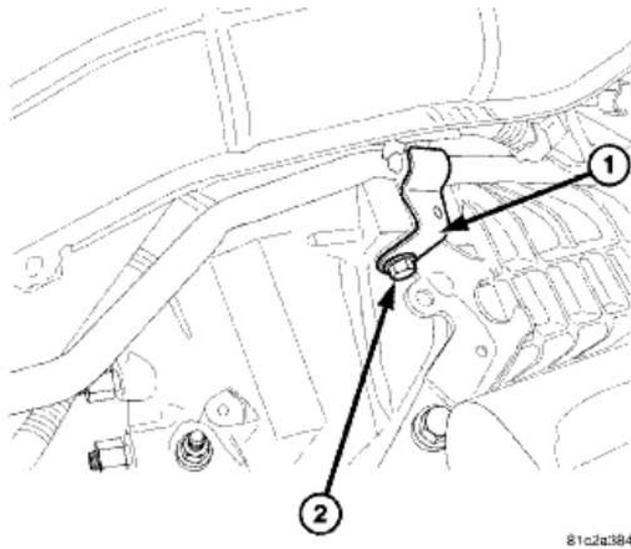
Identifying Heater Tube Bolt At Bellhousing
